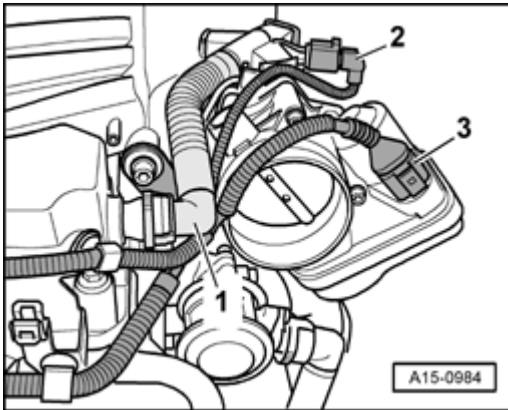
Identifying Electrical Connectors & Crankcase Breather Hose
